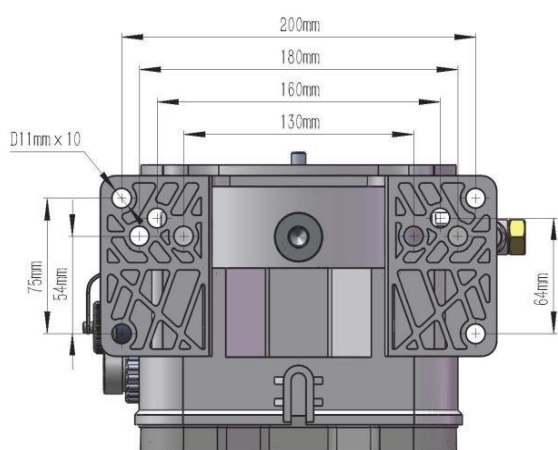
Connection dimensions, hole pattern of the ALPggb
